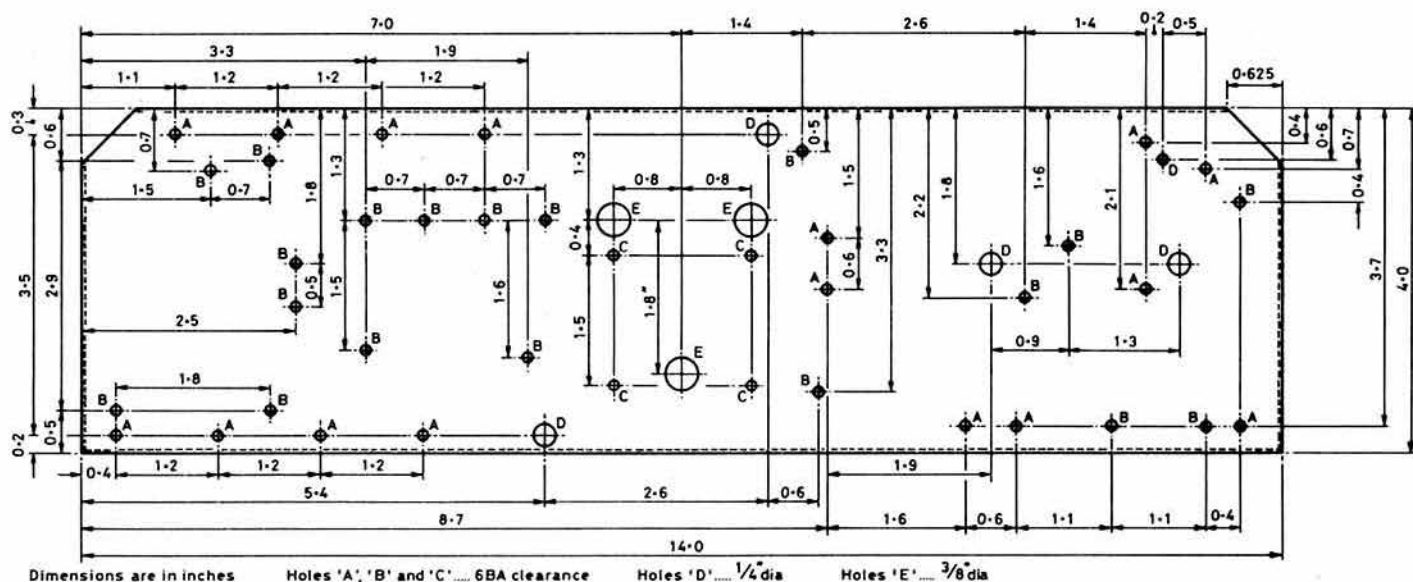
Chassis drilling diagram. This is the side away from the flanges (lower side when the chassis is fitted in the cabinet)
